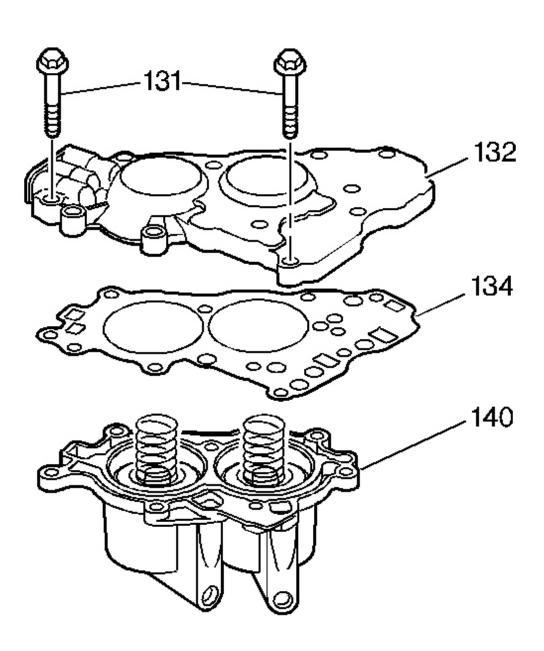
View Of 1-2 Accumulator Piston Components Courtesy of GENERAL MOTORS CORP.
